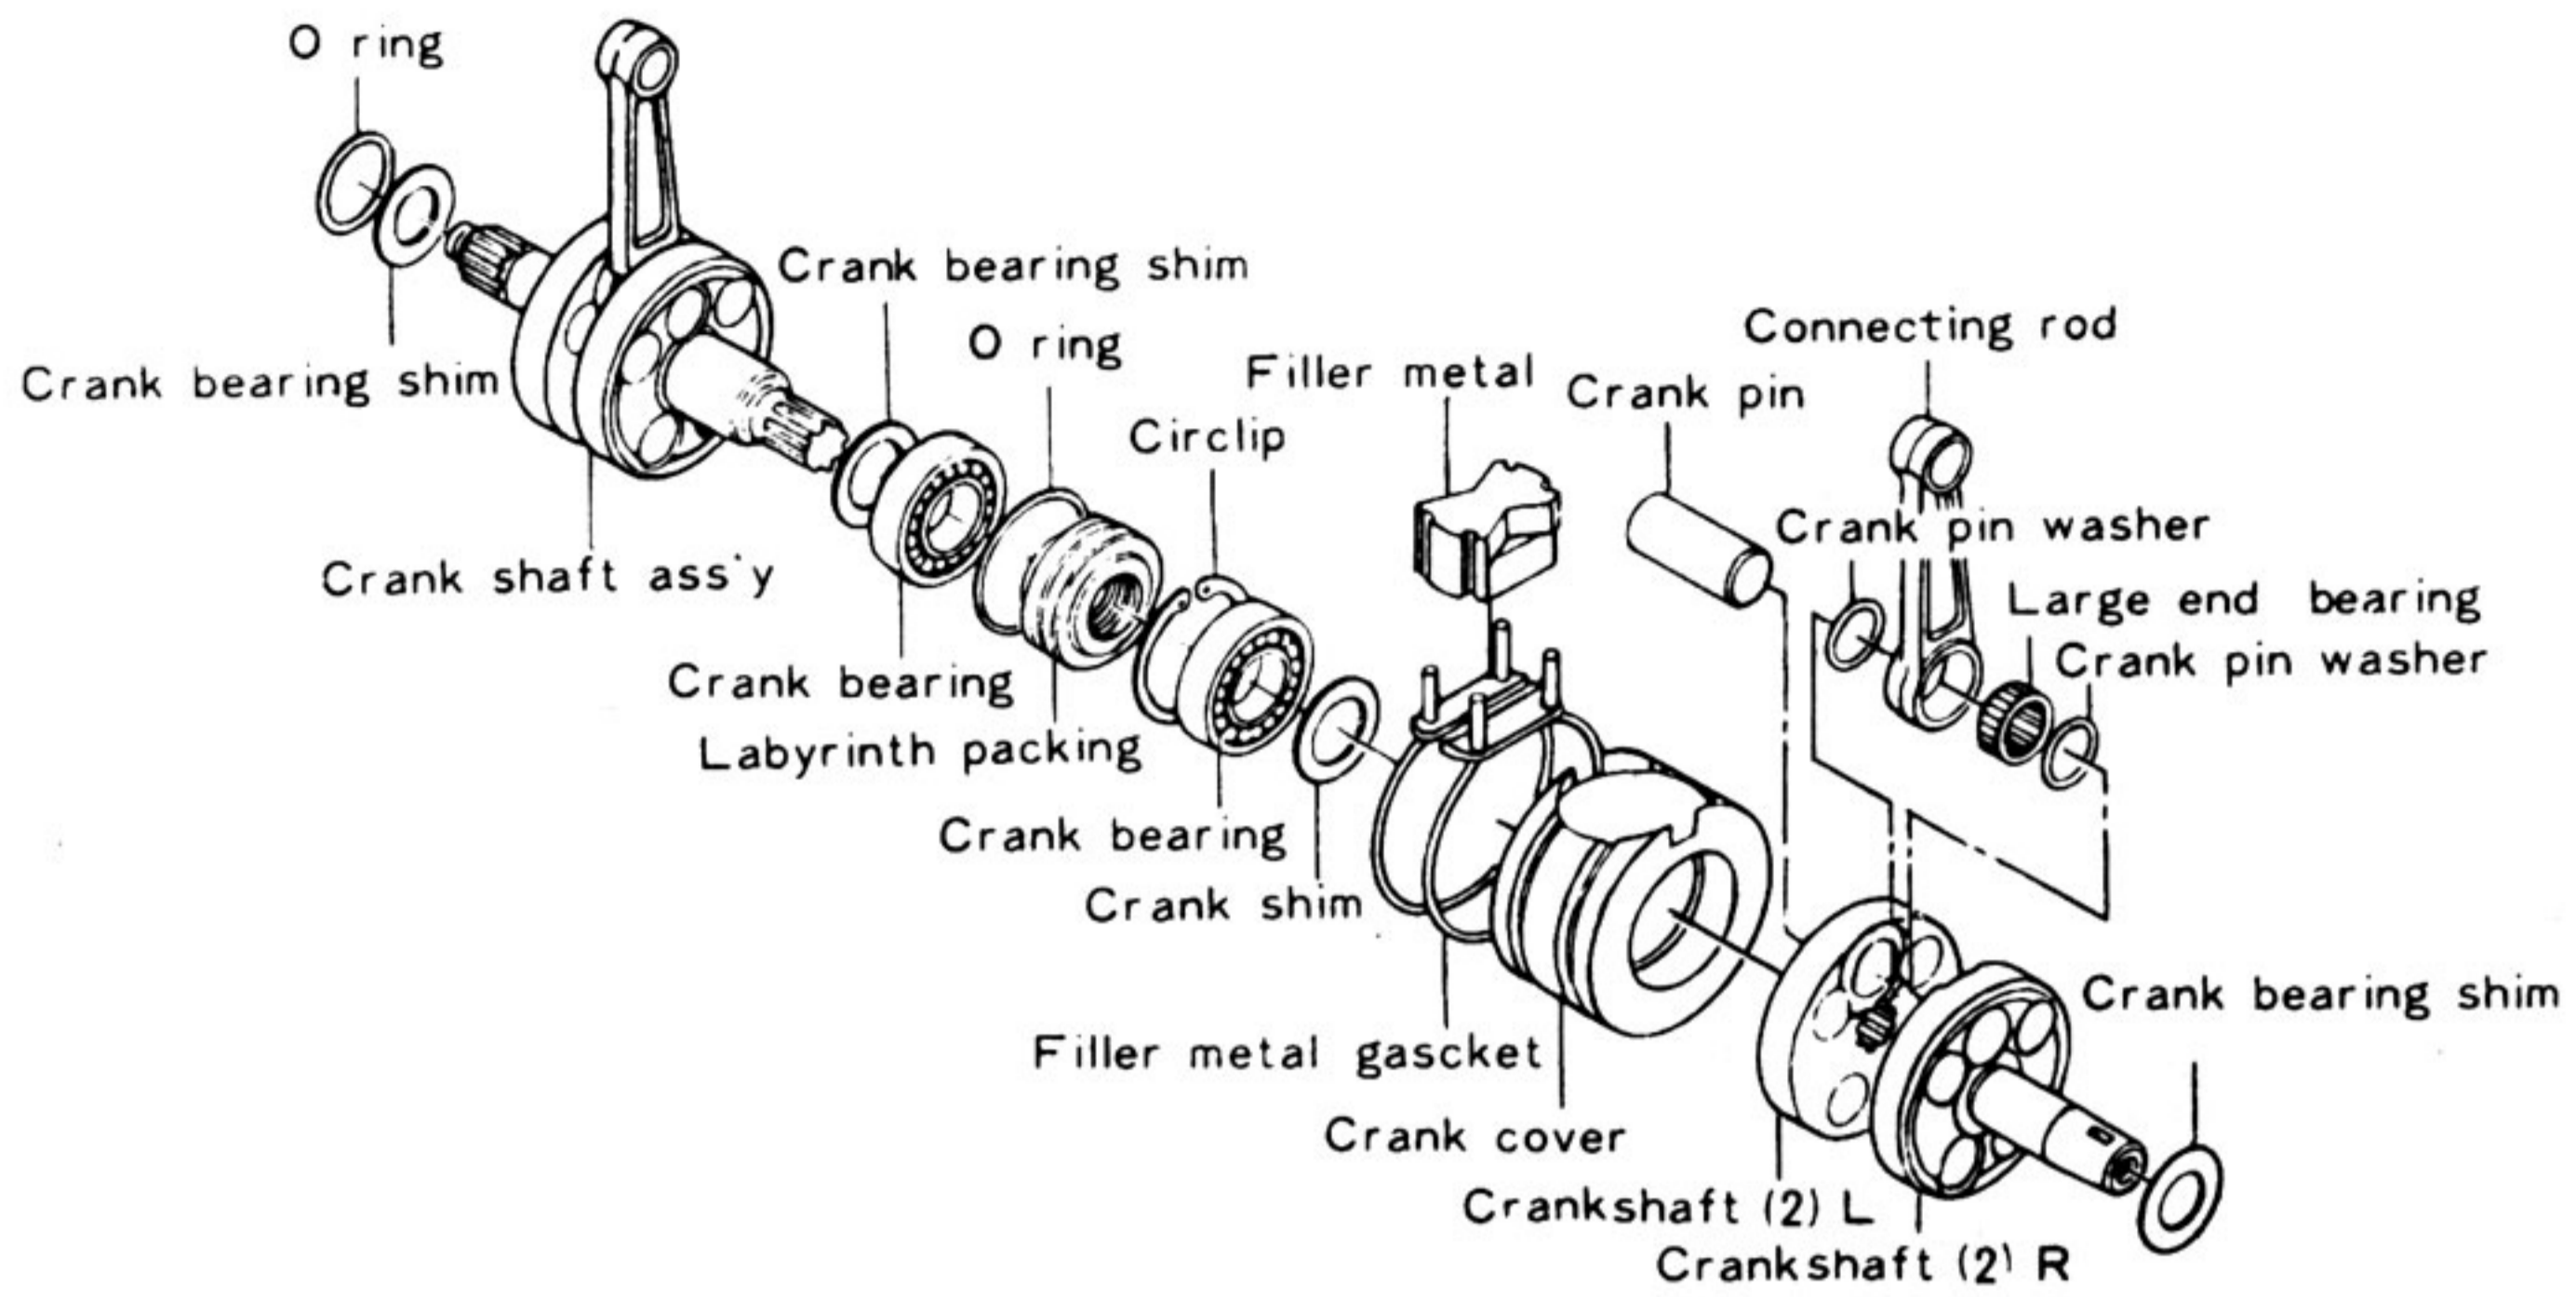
Crankshaft Ass'y Component Parts
